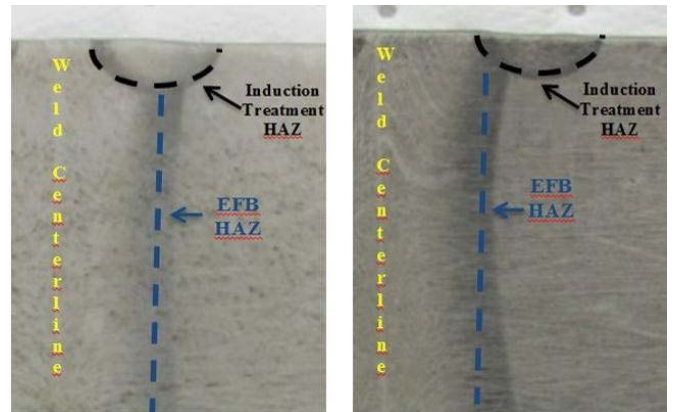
(Left) the right quadrant of an induction treated EFB weld cross section with the correct alignment. (Right) the right quadrant of an induction treated EFB weld cross section with misalignment
